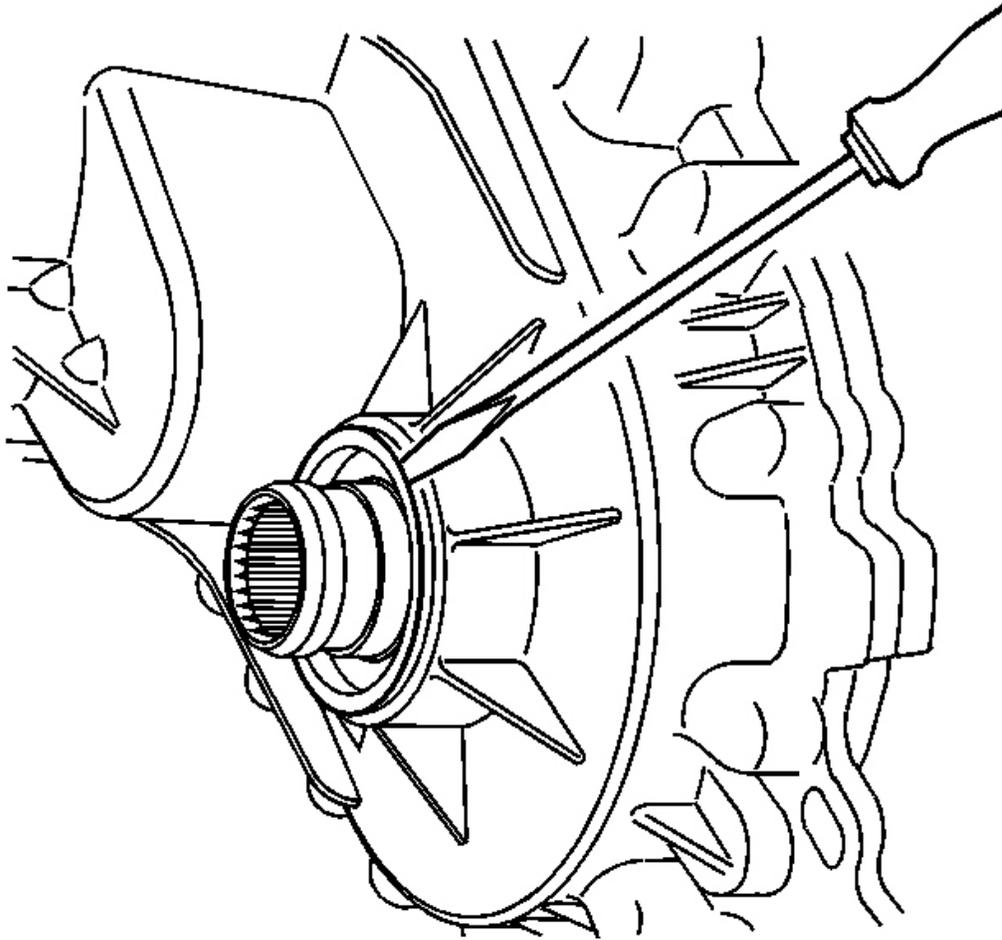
Inserting Screwdriver Behind Inner Race Of Seal
